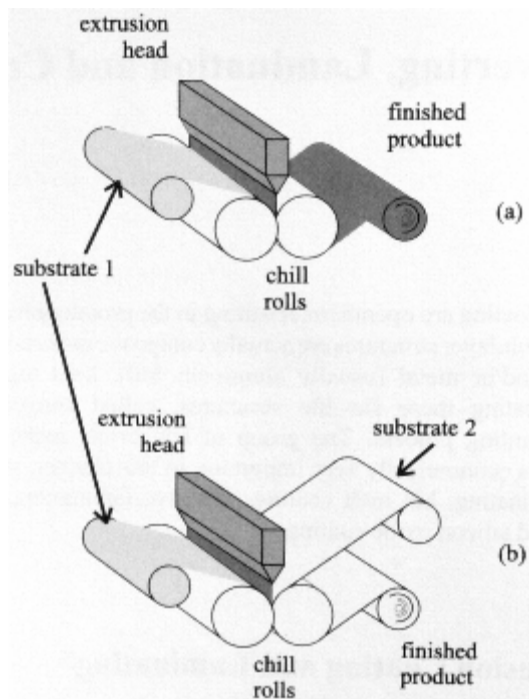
Extrusion coating (a); Extrusion laminating (b)
